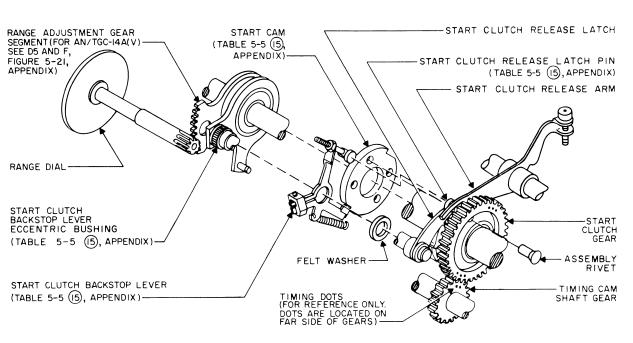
Start Clutch Release Mechanism, Exploded View
